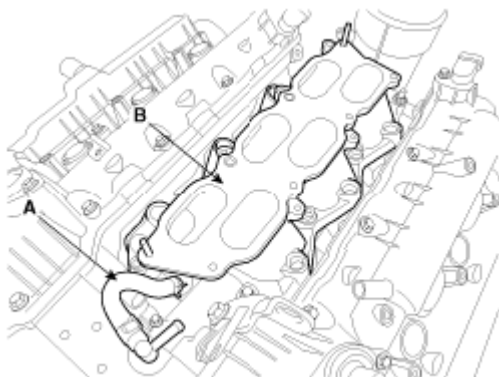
Identifying Water Vent Hose & Intake Manifold
